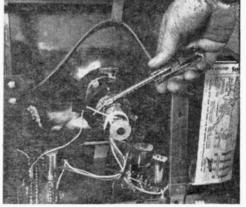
When yoke is positioned, tighten clamp screw, being careful not to over-tighten.
